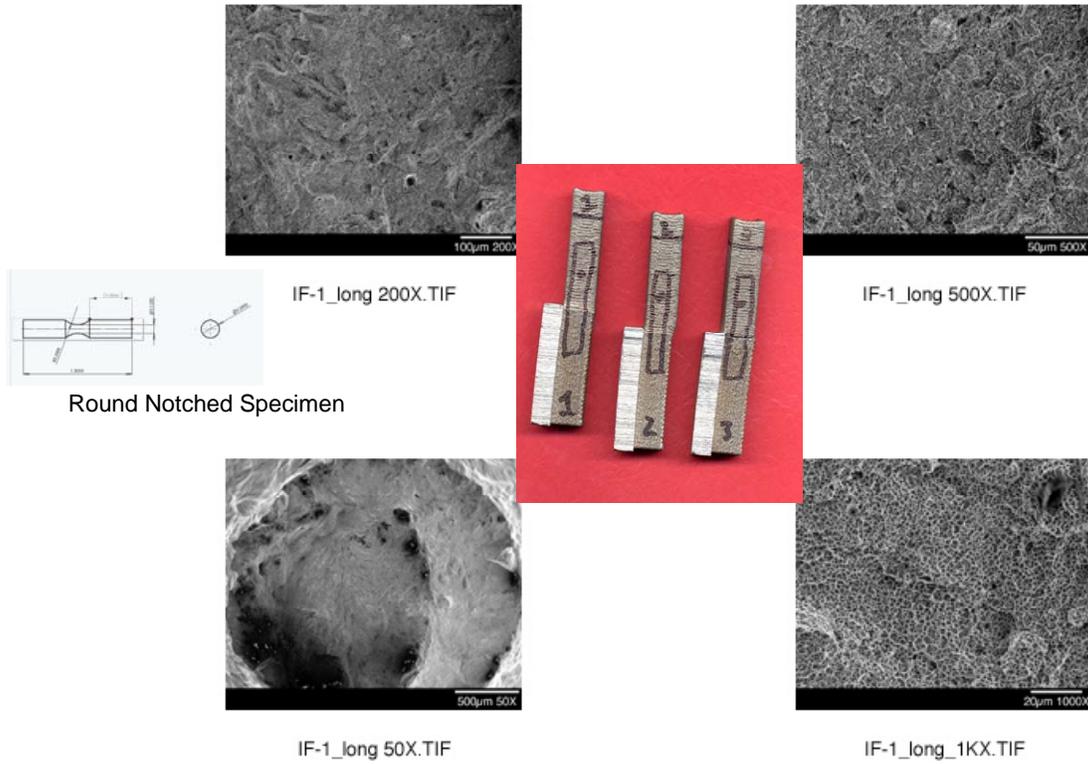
Fracture Surface of a Type L Block/Tower LENS Build.
